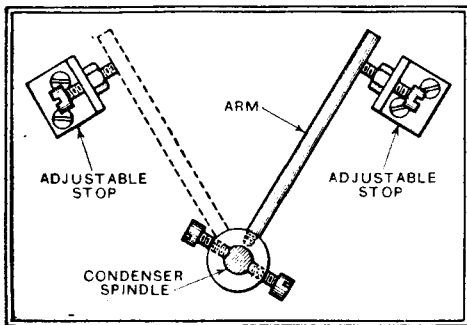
Pre-set tuning: method of locating alternative condenser adjustments.
